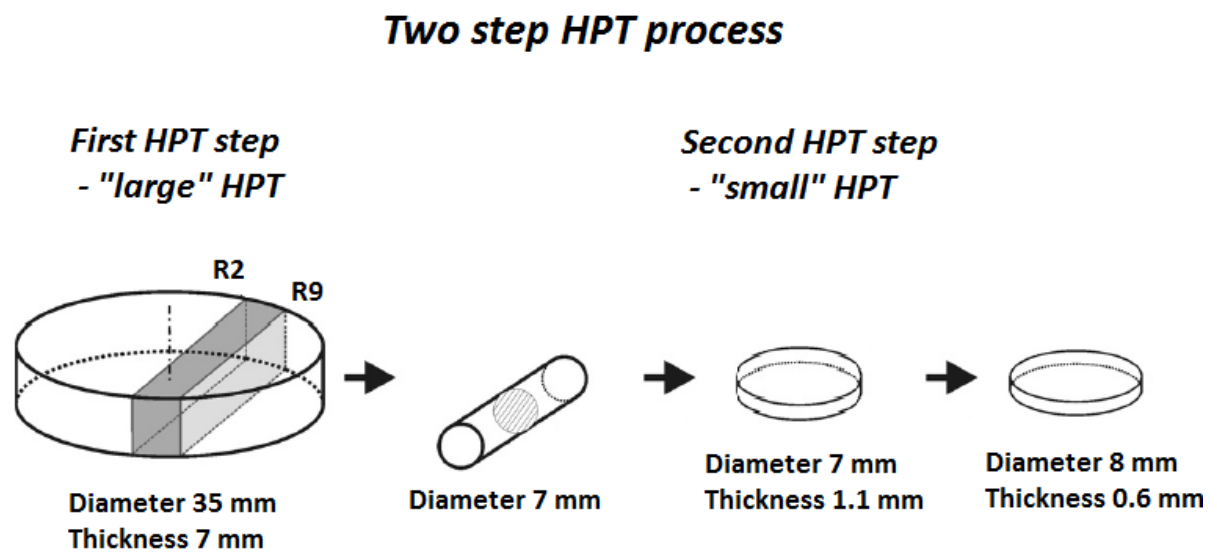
Schematic view of the “two step” HPT process, adapted from [12].
